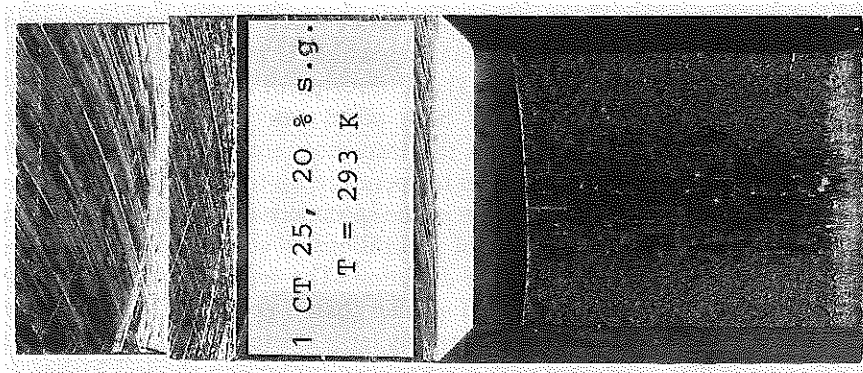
Fracture surface of a specimen tested at 293 K (separations, stable crack growth)
